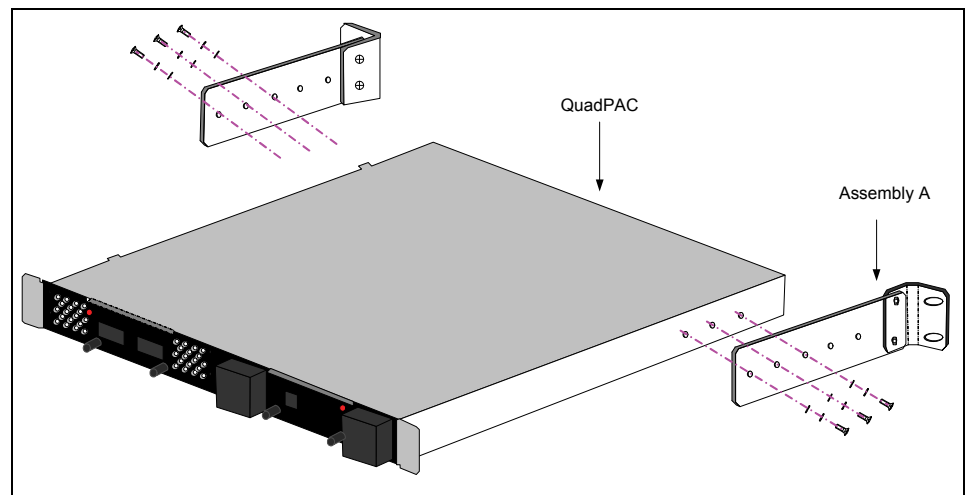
Attaching Mounting Ear Assembly to QuadPAC
